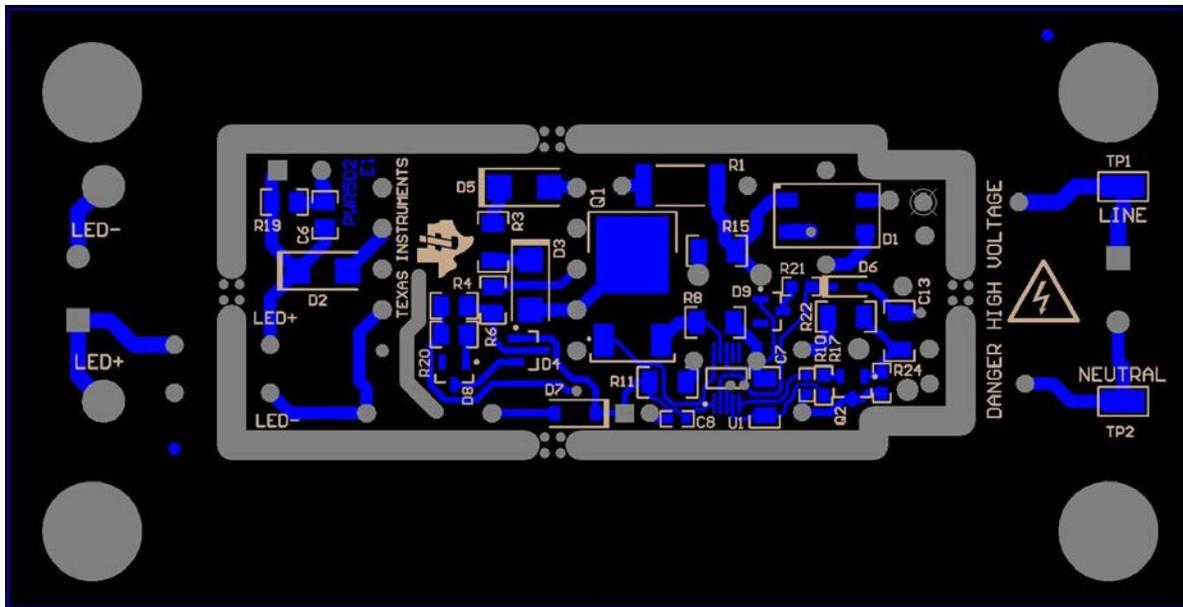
Bottom Layer and Bottom Overlay (Bottom view)
